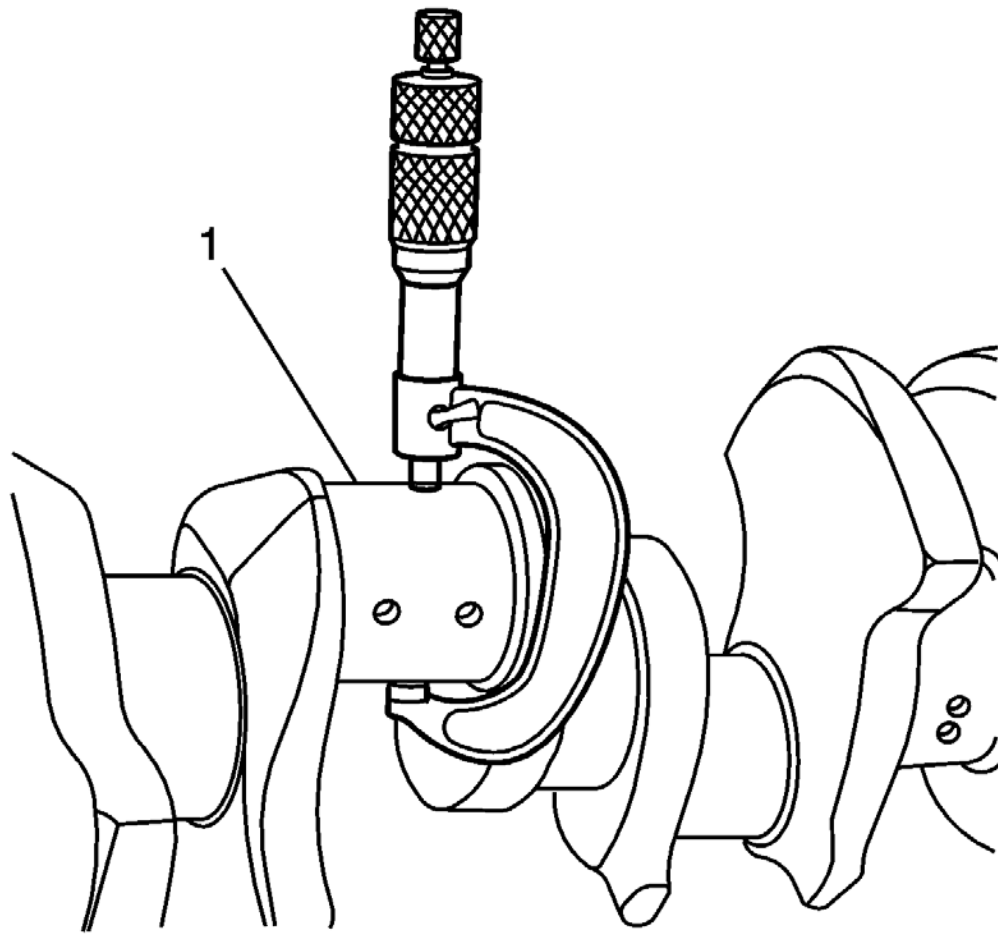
Measure Crankshaft Journals For Out-Of-Round
